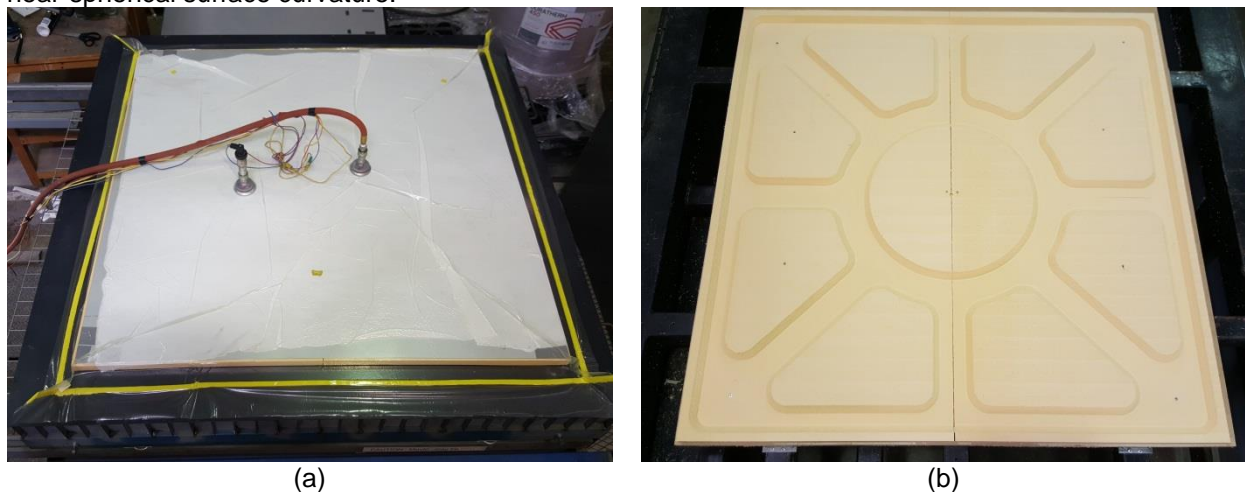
(a) The vacuum bag assembly process and (b) the foam die used to focus the vacuum force on the support flanges during assembly.
